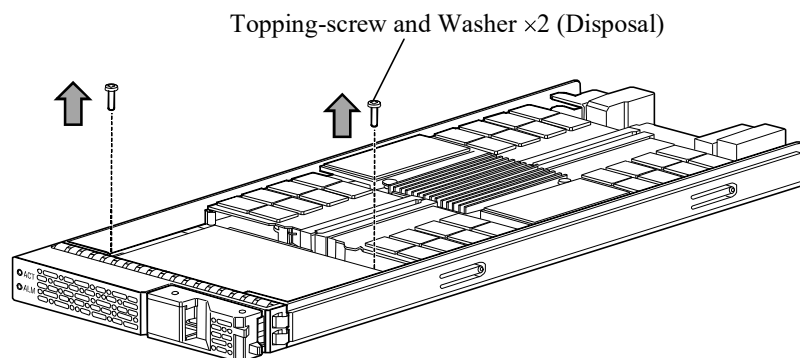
Removing Tapping-screws and Washers
